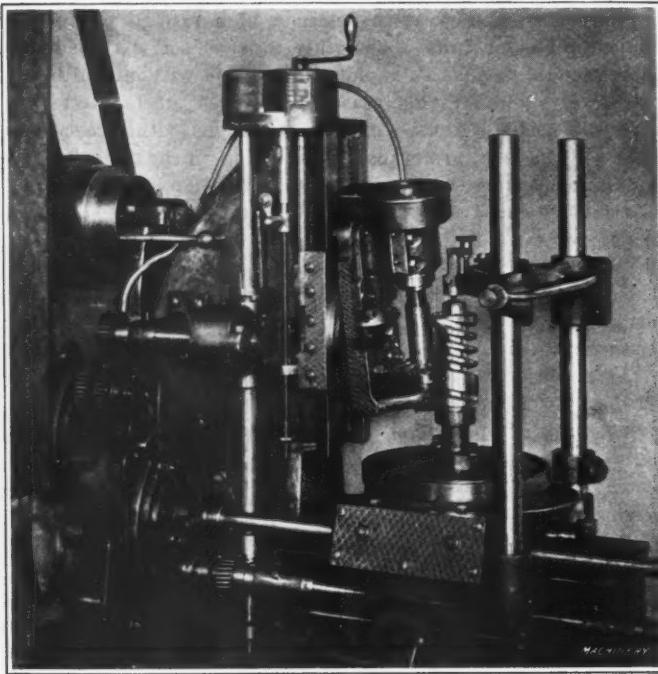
Milling a Double Thread on a Farwell Gear-hobbing Machine equipped with a Single Milling Cutter
